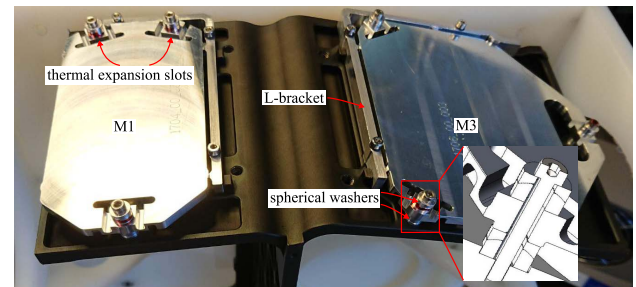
M1 and M3 breadboard/prototype mirrors fixed in the black-coated aluminum mounting structure. A cross section of a mounting point with spherical washers on each side of the mirror is shown at the bottom.
